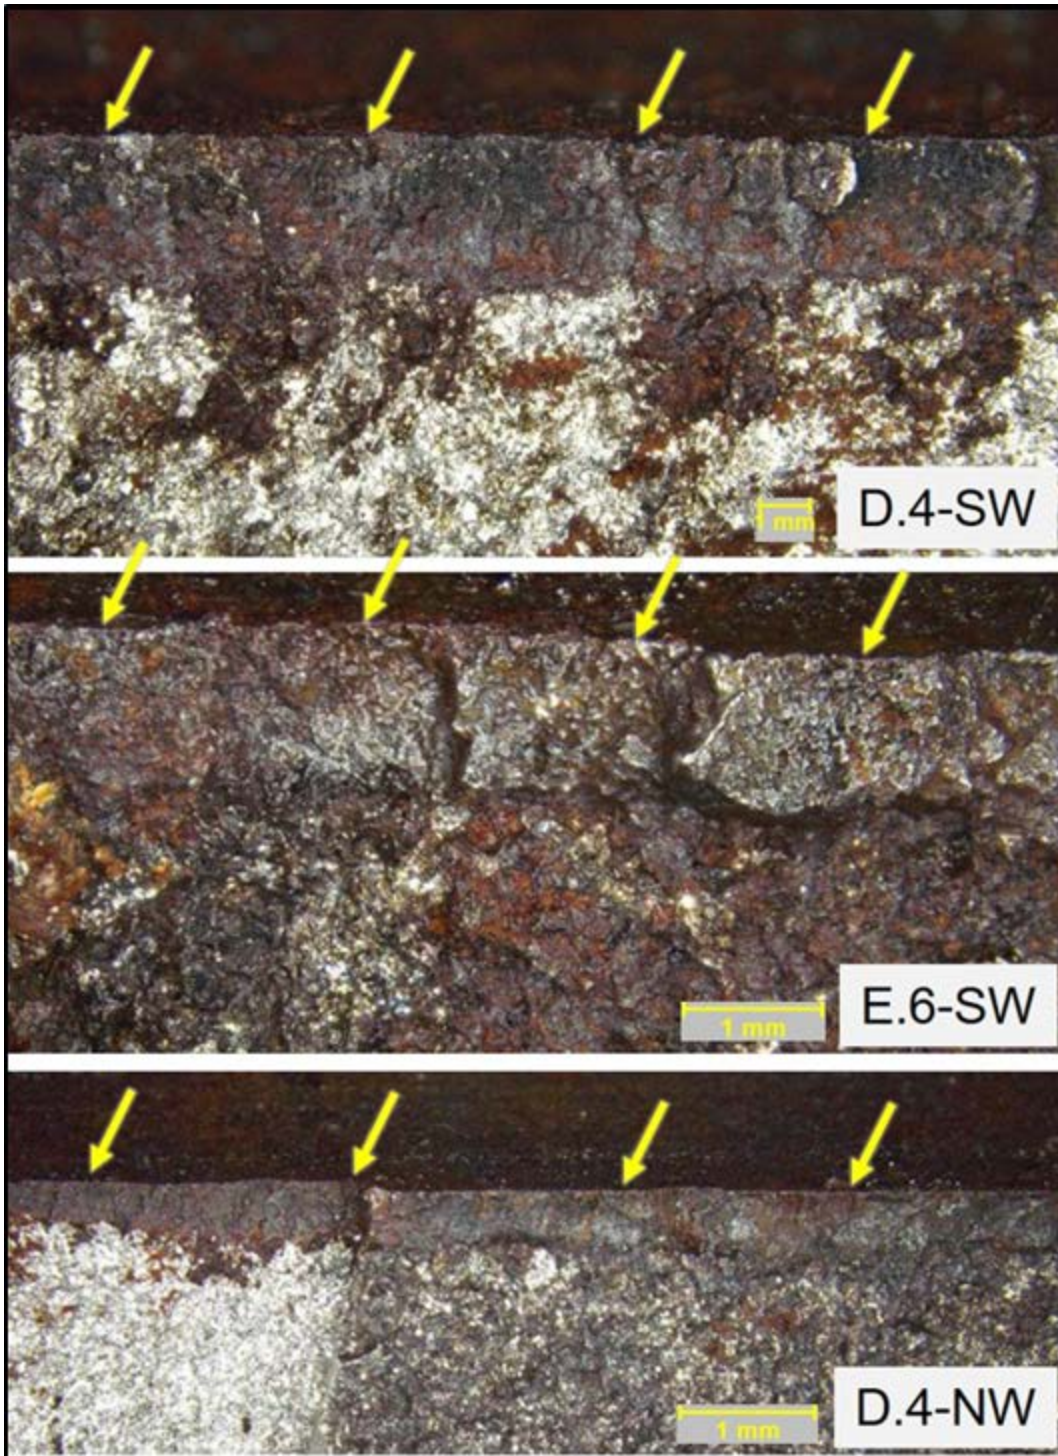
Fracture origins of samples D.4-SW (top), E.6-SW (center) and D.4-NW (bottom) showing microcracks that initiated during thermal cutting of the access holes.
